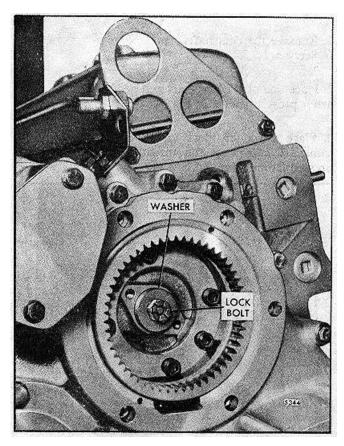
Left-Hand Rotation (Right bank) Camshaft Gear Mounting
